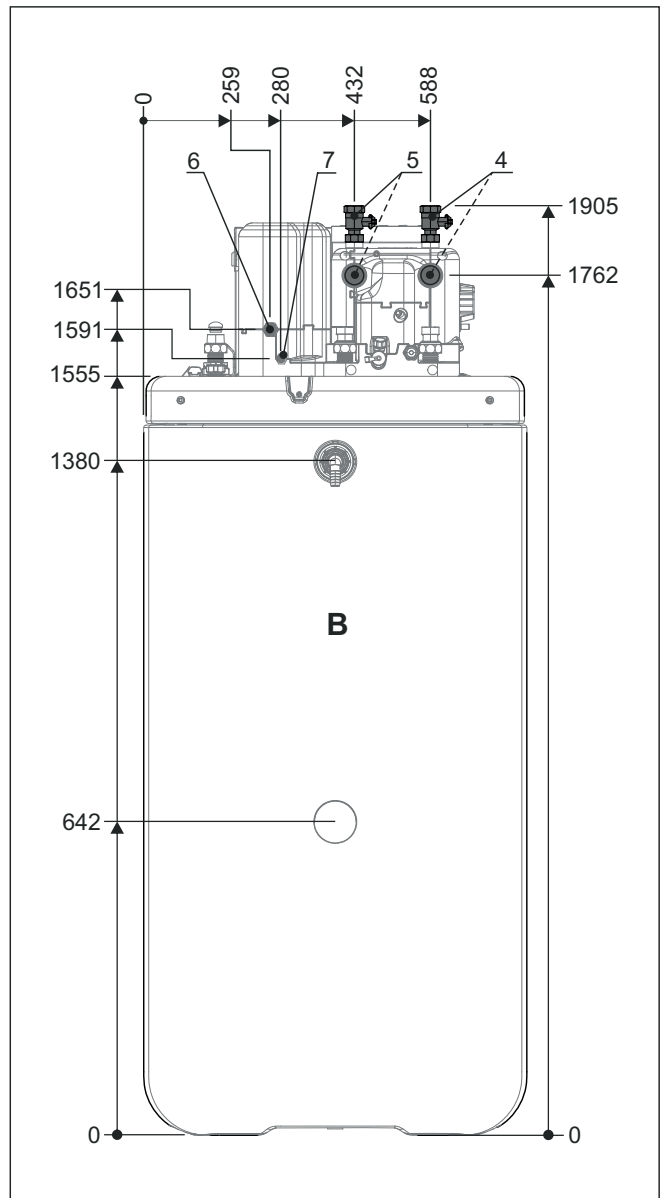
Dimensions, side view - Type ...04P50D/...08P50D
